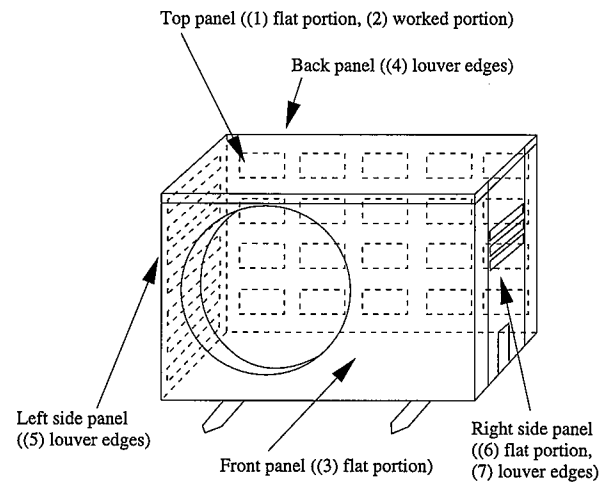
Exposure-tested outdoor unit of air conditioner and positions of corrosion inspection
